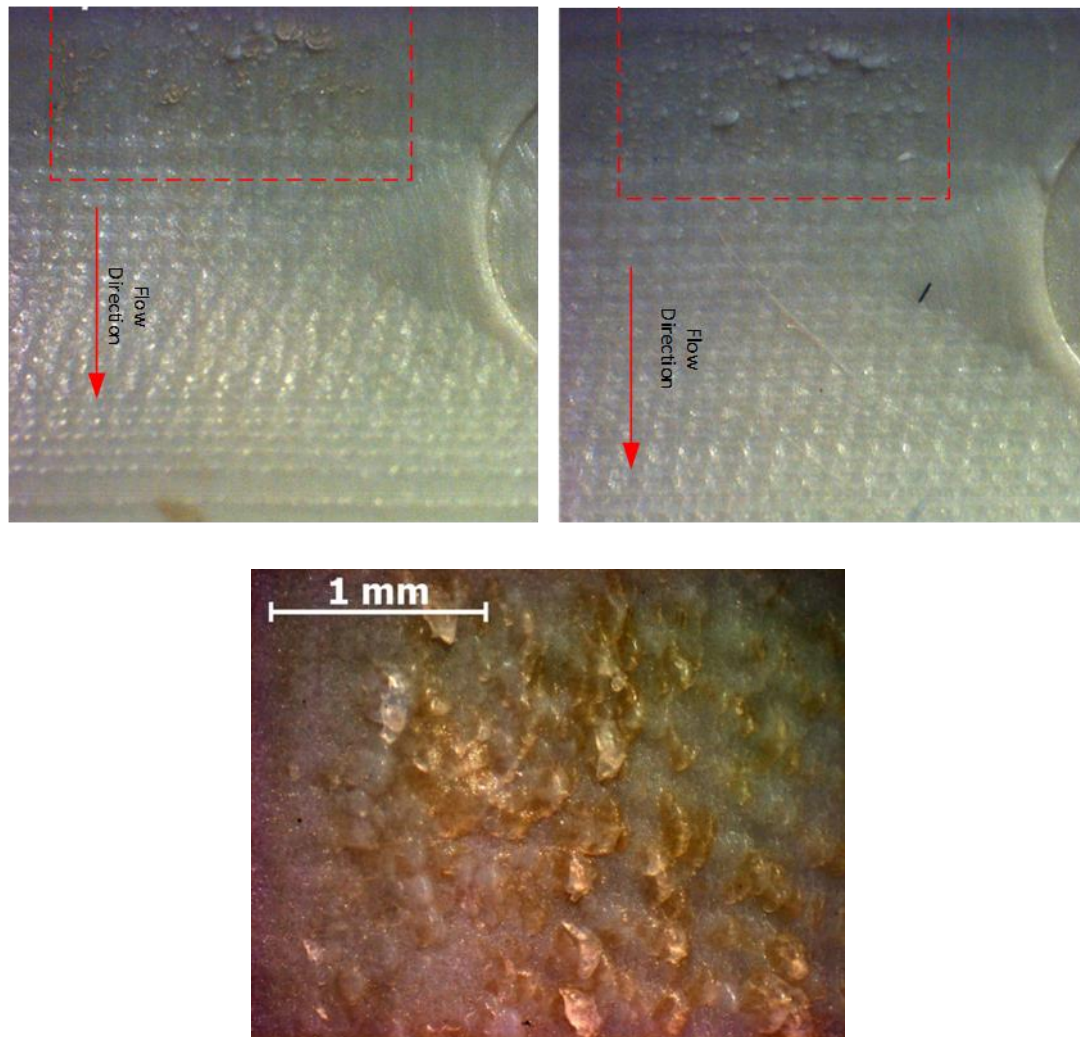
(a) Tool material eroded and deposited on the 7th shot from the tool. (b) Protrusions on the 8th part due to surface deterioration of tool in the same vicinity. (c) Magnified image of the area of eroded tool surface.
